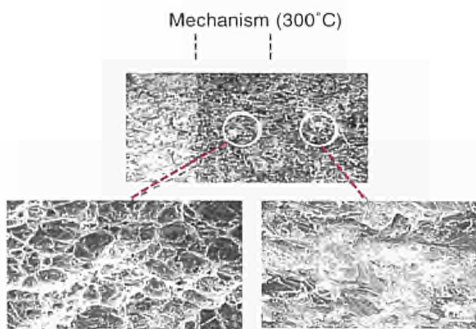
Details of the fracture surface of a CT-specimen broken at 300°C Cleavage fracture (below right) is preceded by ductile crack propagation showing the typical dimple structure (below left). No second phase particles were found at the bottom of the dimples.
